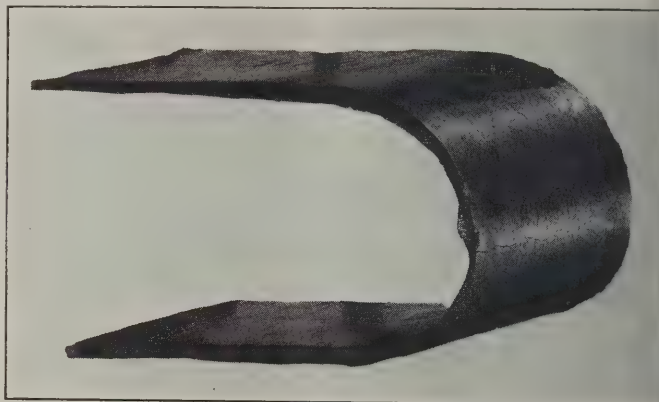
Photograph Showing Bend in $\frac{1}{4}$ in. Arc-Welded Monel Plate
